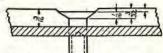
Showing how the flat-head solid or tubular rivet is used with the head countersunk into the lining.
